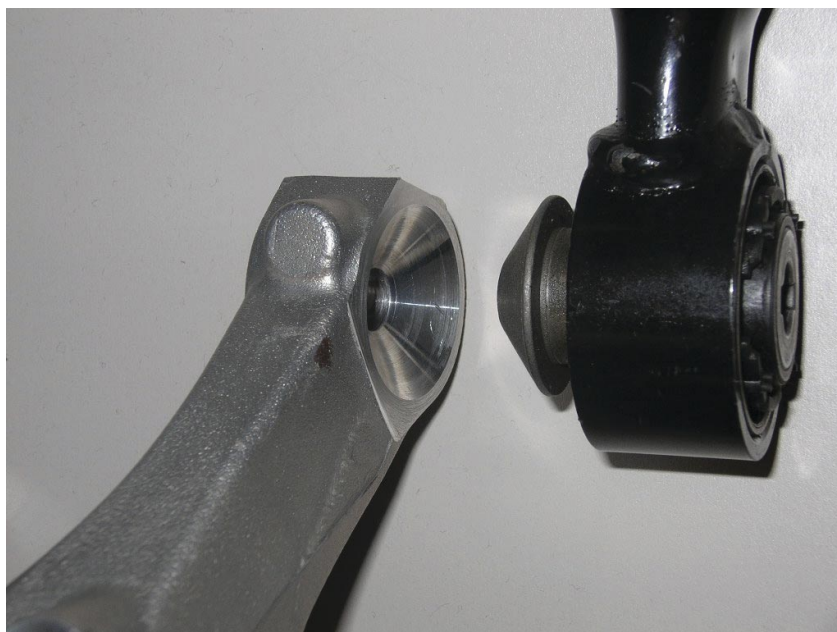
Close-up view of Knuckle Cone Seat and Inner-Sleeve
